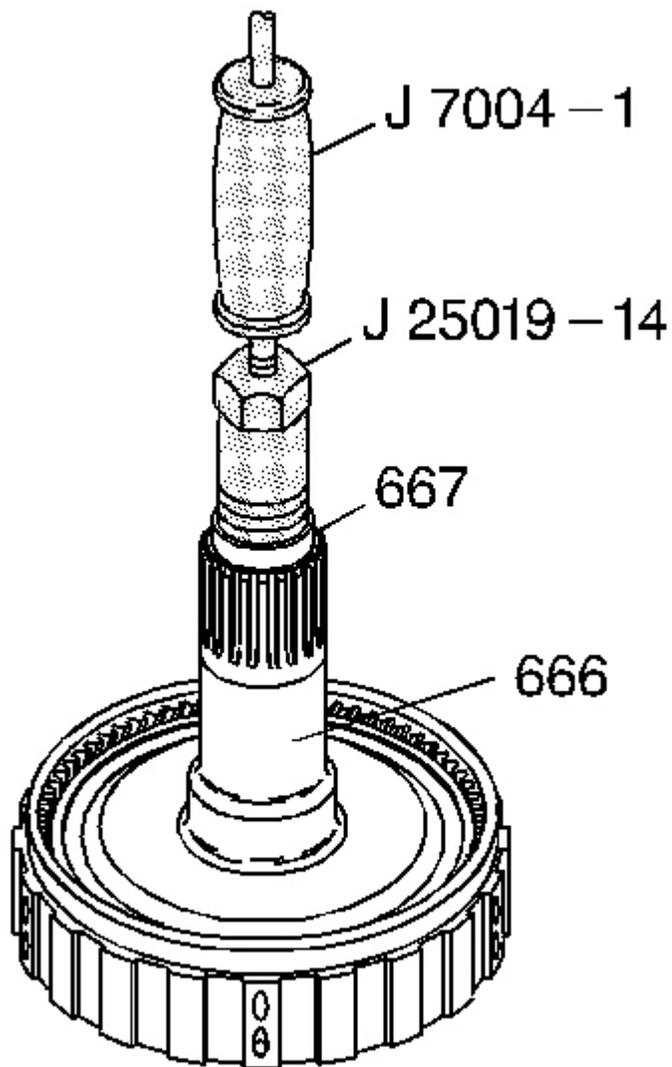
Removing Reaction Carrier Shaft Rear Bushing Using J 25019-14 & J 7004-A
